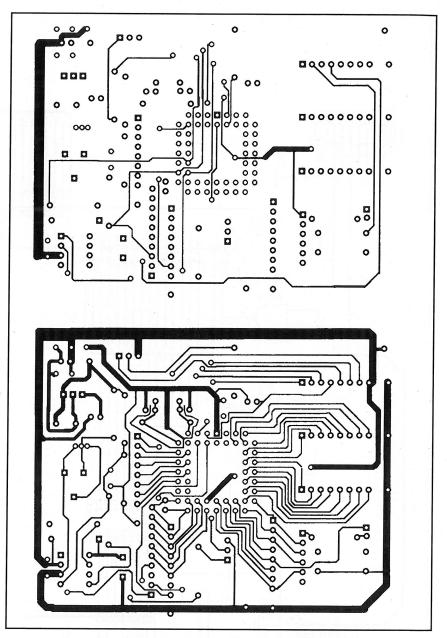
Actual-size etching-and-drilling guides for component (upper) and solder (lower) sides of Magtroll's printed-circuit board.
